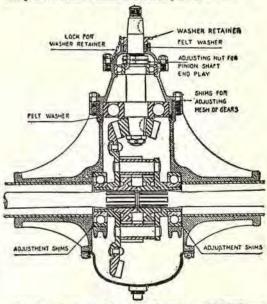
Sectional view of the Franklin model "9B" rear axle, showing the points of adjustment.
